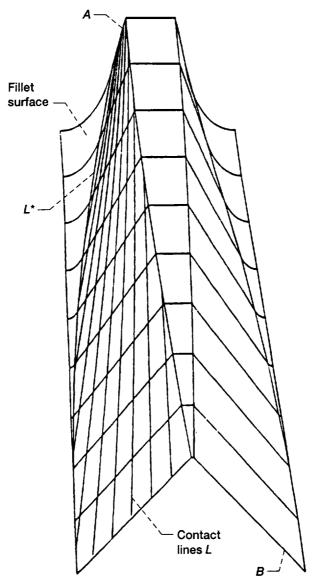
Tooth of face gear in three-dimensional space.
